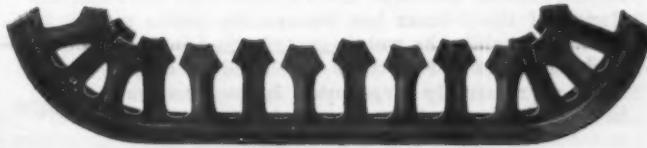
(Below) Section of Rolled Steel I-Beam After First Forming Operation.
